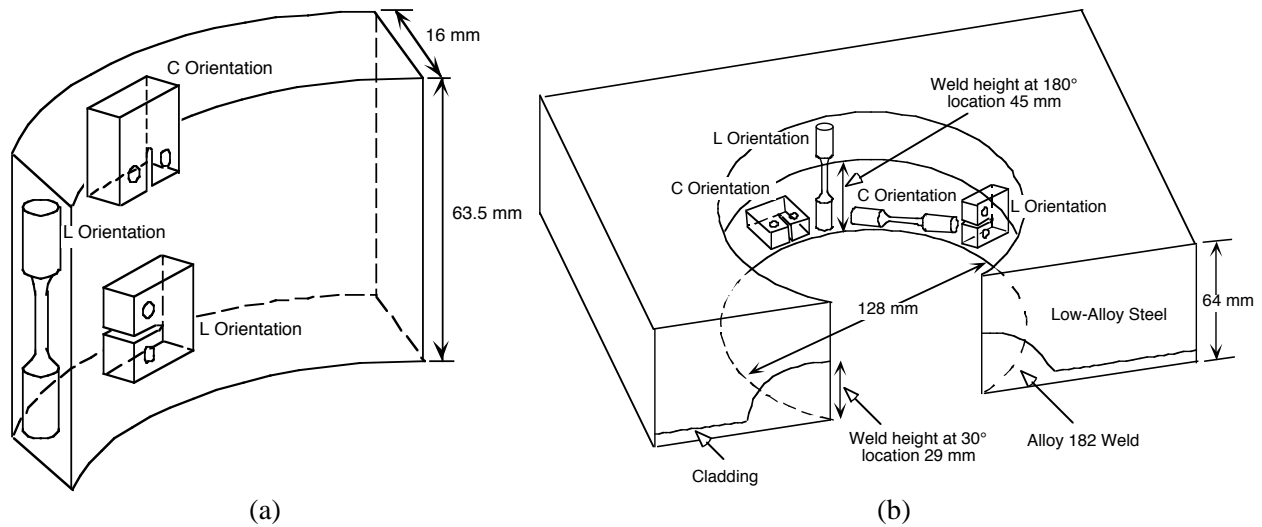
Orientation and location of the mechanical-test specimens obtained from Davis-Besse (a) CRDM Nozzle #3 and the (b) J-groove weld of Nozzle #11.
